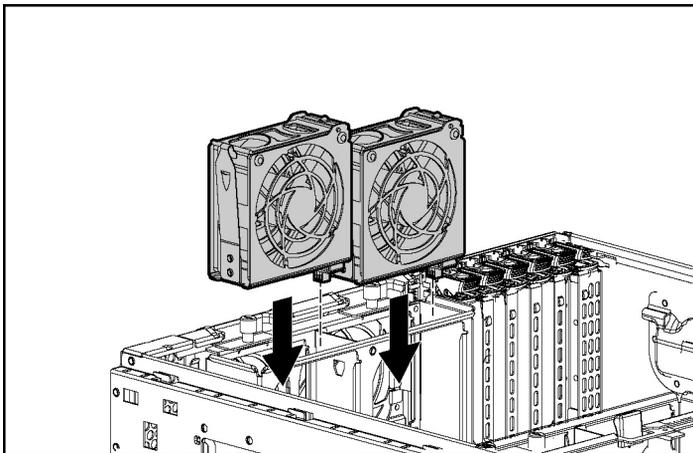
Installing hot-plug fans in the redundant fan cage
